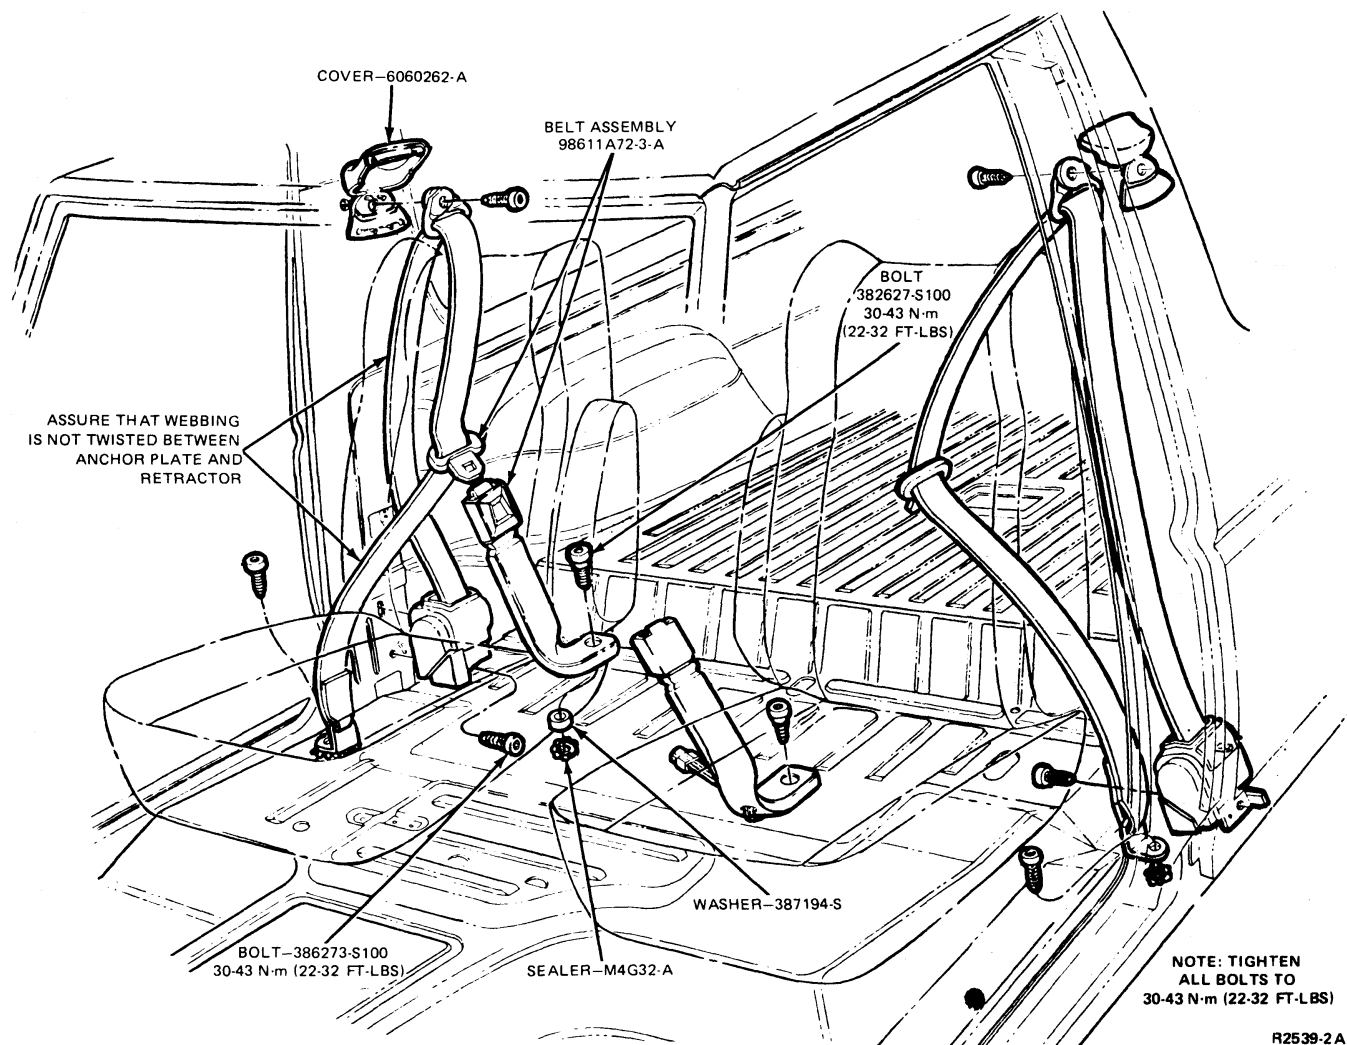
Seat Belt Installation—Bronco Front Bucket Seat
